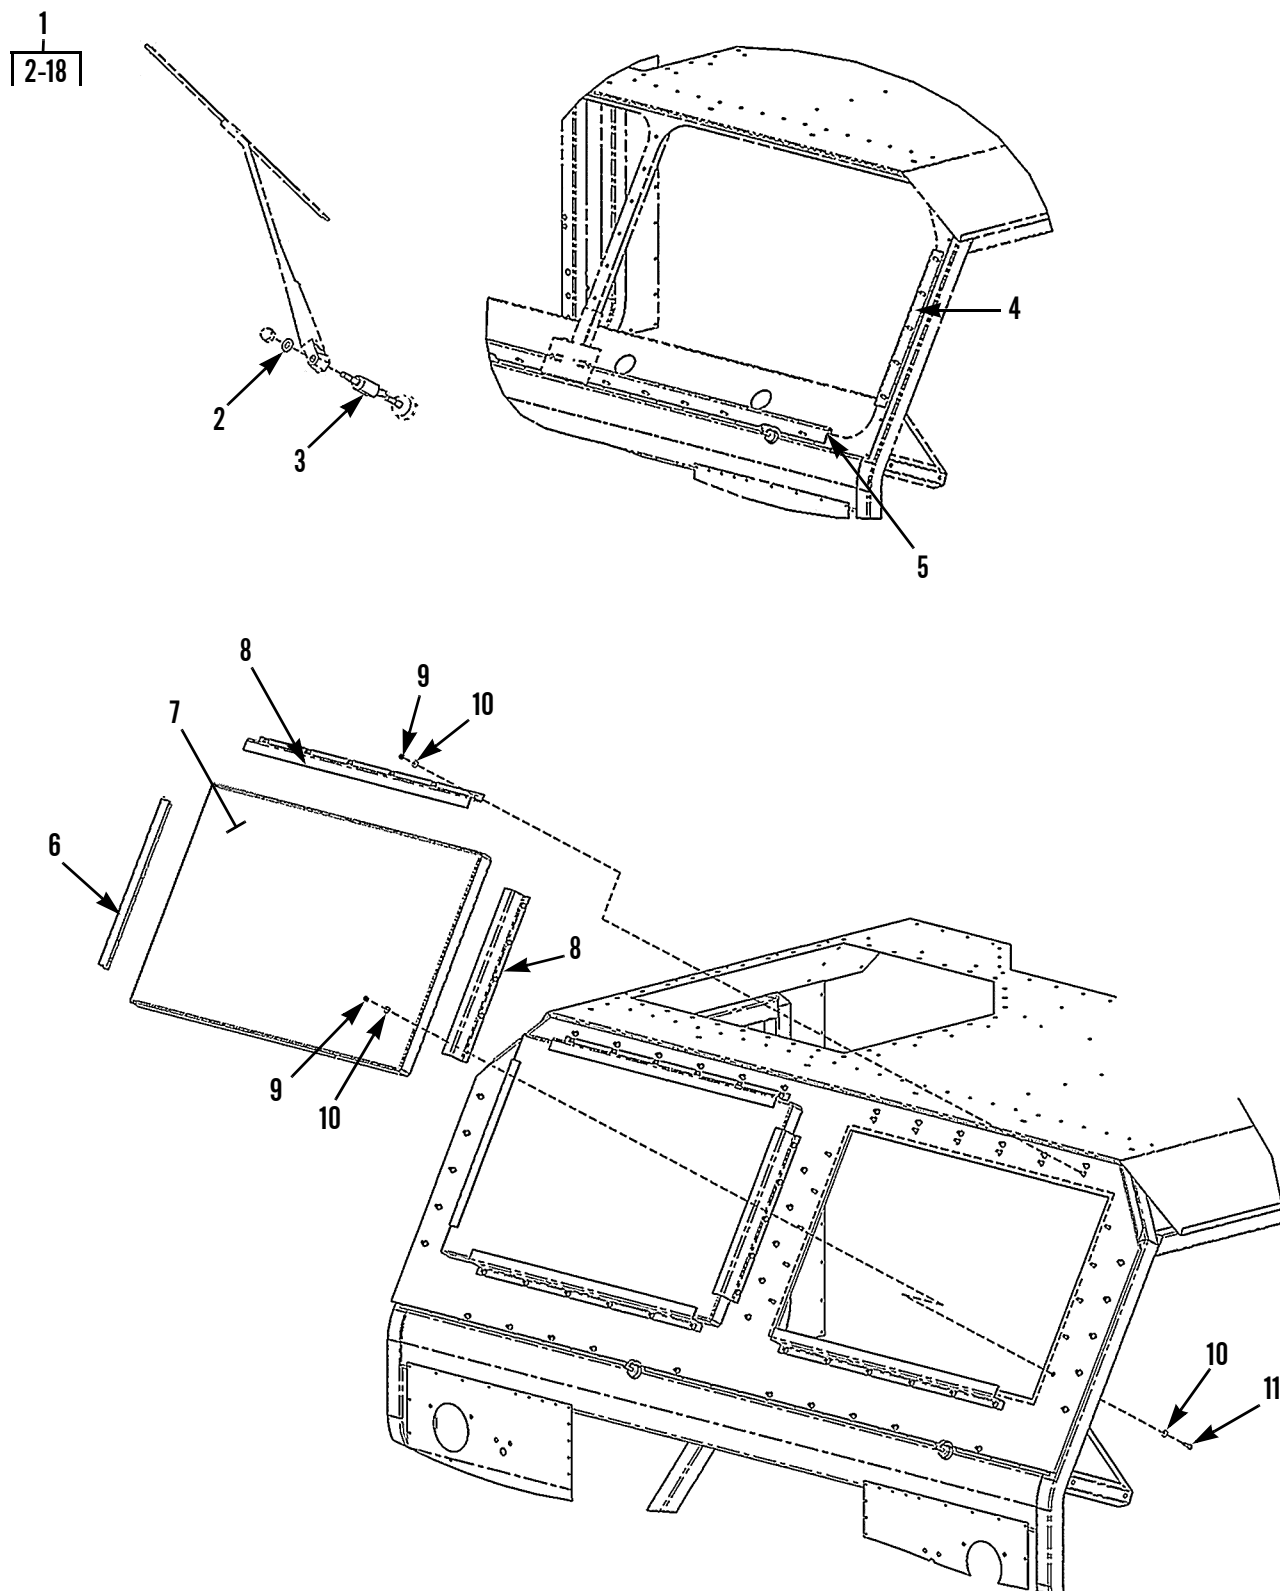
Windshield Armor Kit and Mounting Hardware (Sheet 1 of 2)
